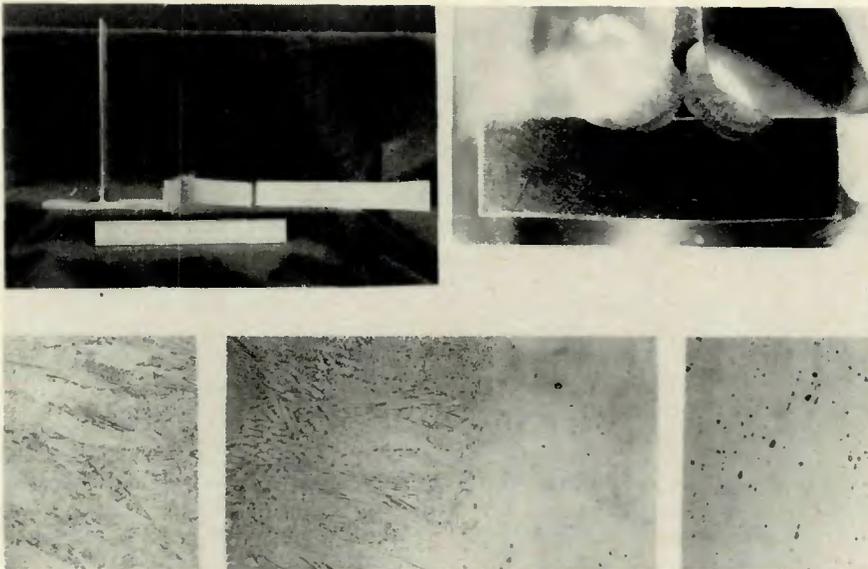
Aged double fillet weld T-joints before and after tensile testing. Fracture has occurred in base metal. Microstructures of weld zone, weld/base metal interface and base metal are shown from left to right (electrolytic etch, X100, reduced 52%)
